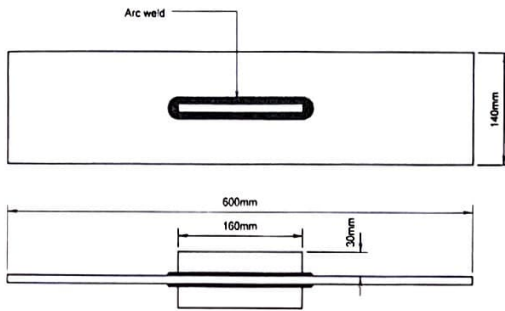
Schematic representation of F2 class fatigue crack repair test specimen.
